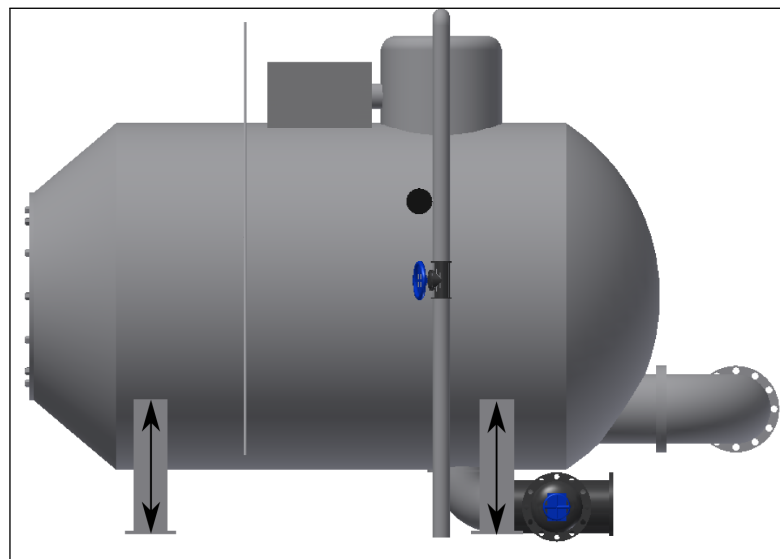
3D CAD drawing of the suggested design of the draft tube tank with inlet, outlets, vacuum pump, water level pipe and venting pipe.
